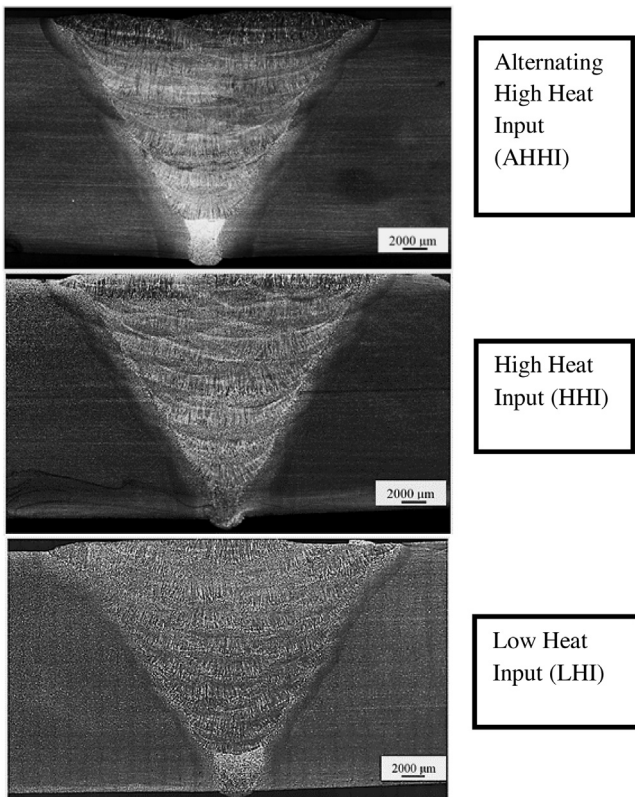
Optical macrographs to show the geometry of three welded geometry.
